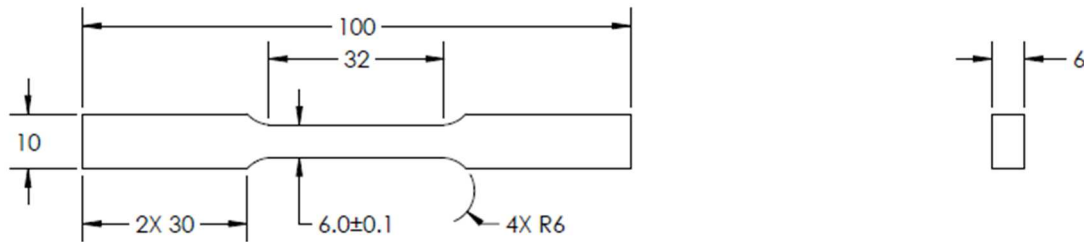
Schematic of Subsize Tensile Specimen. All dimensions are in millimeters and follow ASTM E8 specification [9]. The complete drawing is included in Appendix A.
